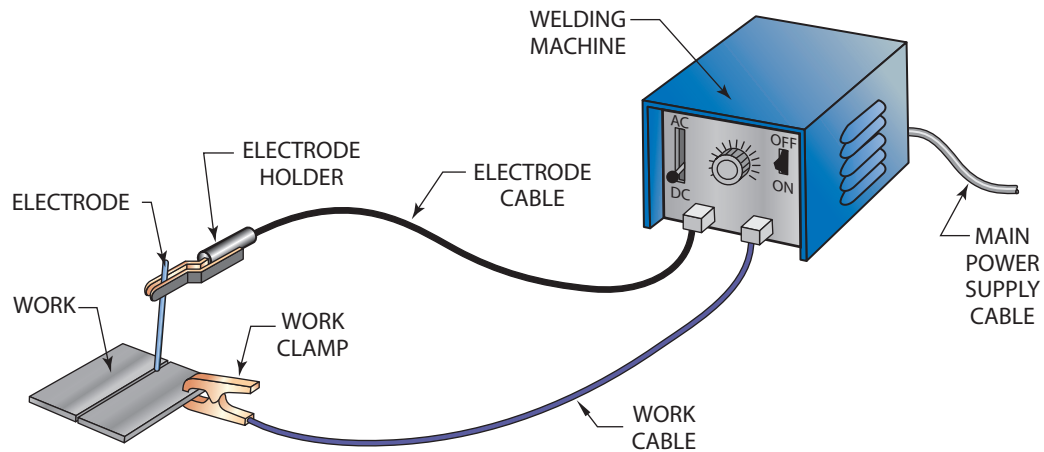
Shielded metal arc welding equipment.
